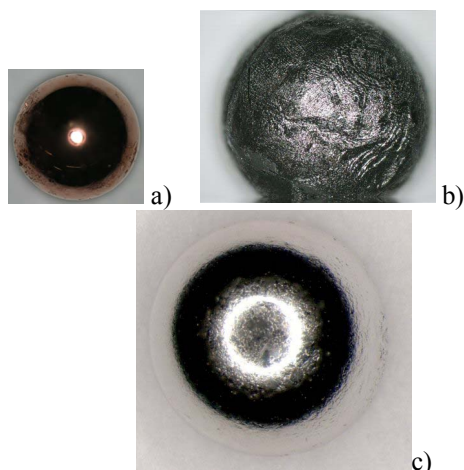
Examples of metal (solder) spheres; a) Cu (1.1mm)
